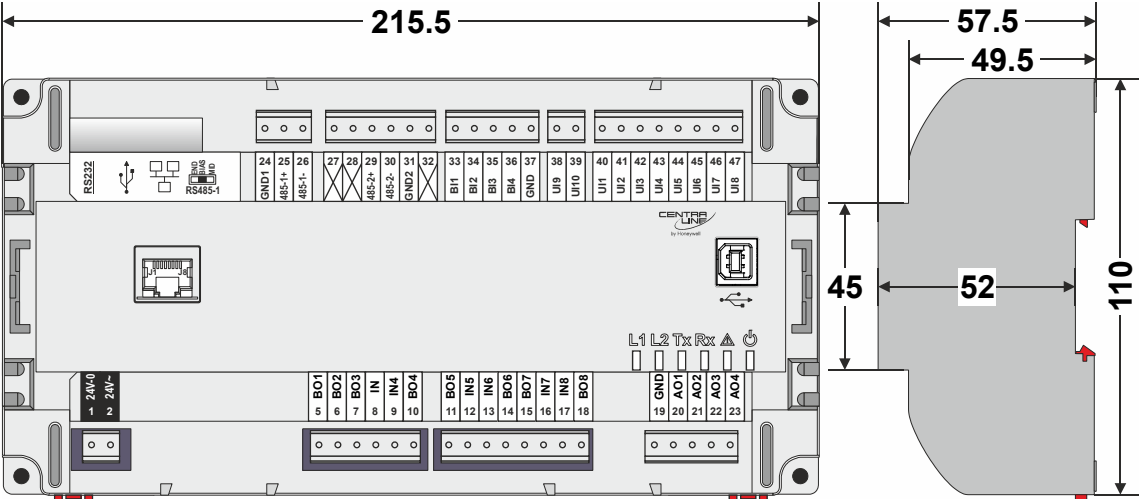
EAGLEHAWK Controller (shown: model with onboard I/Os), dimensions (in mm)
